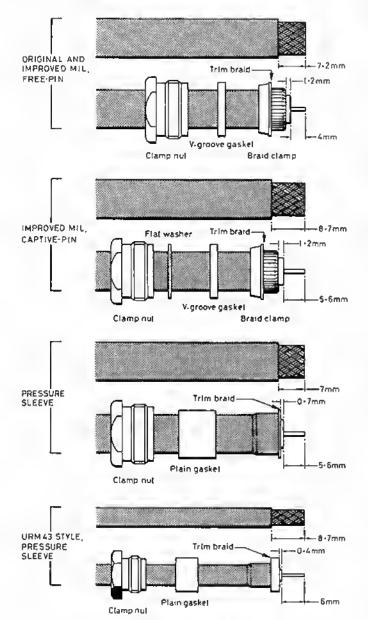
N-type dimensions, plugs, angle plugs and line sockets
